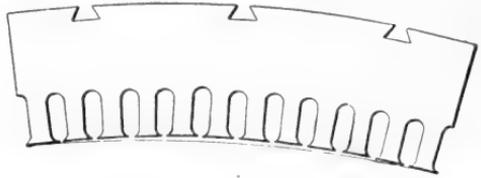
Drawing showing Segment Notched and Trimmed.
